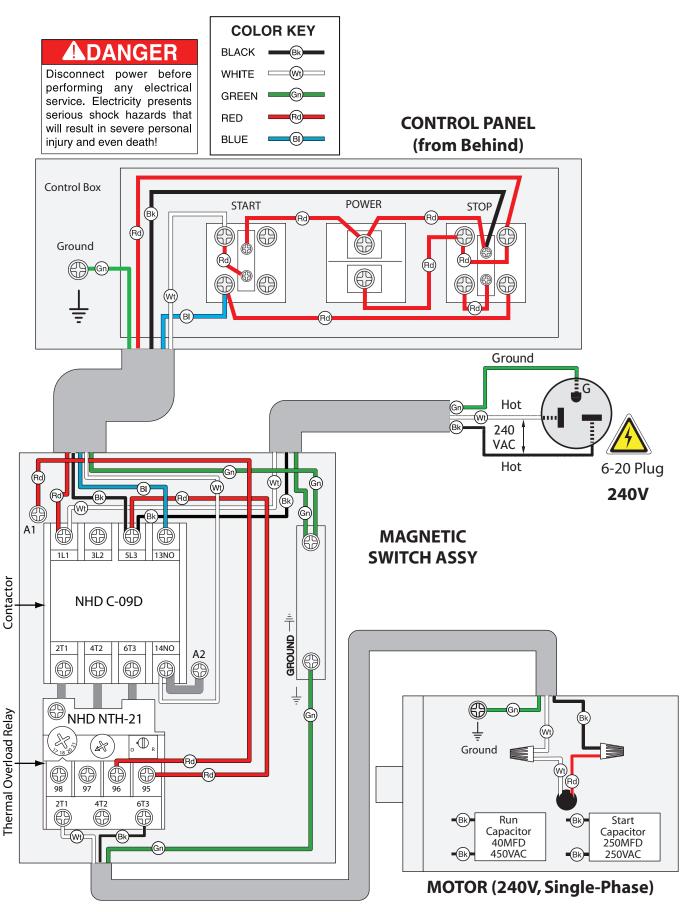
ST1007 & ST1012 magnetic switch assembly.
